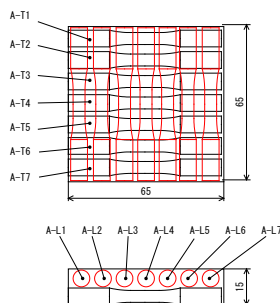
Raw plate material (Material A) and cutting layout for specimens
